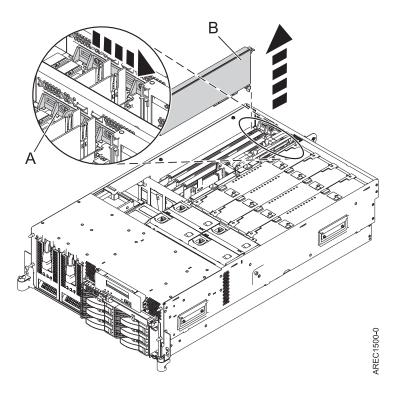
PCI adapter or filler plate removed from the rack-mounted system unit
